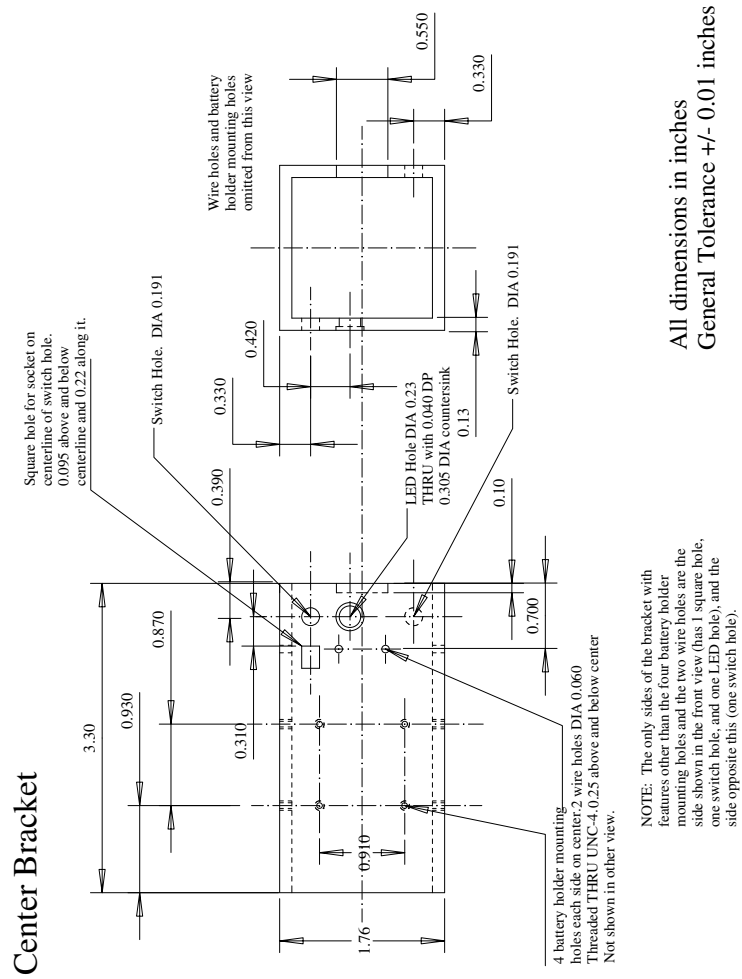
Middle portion of the three part torque sensor bracket housing the amplifier/filter board and switches.
